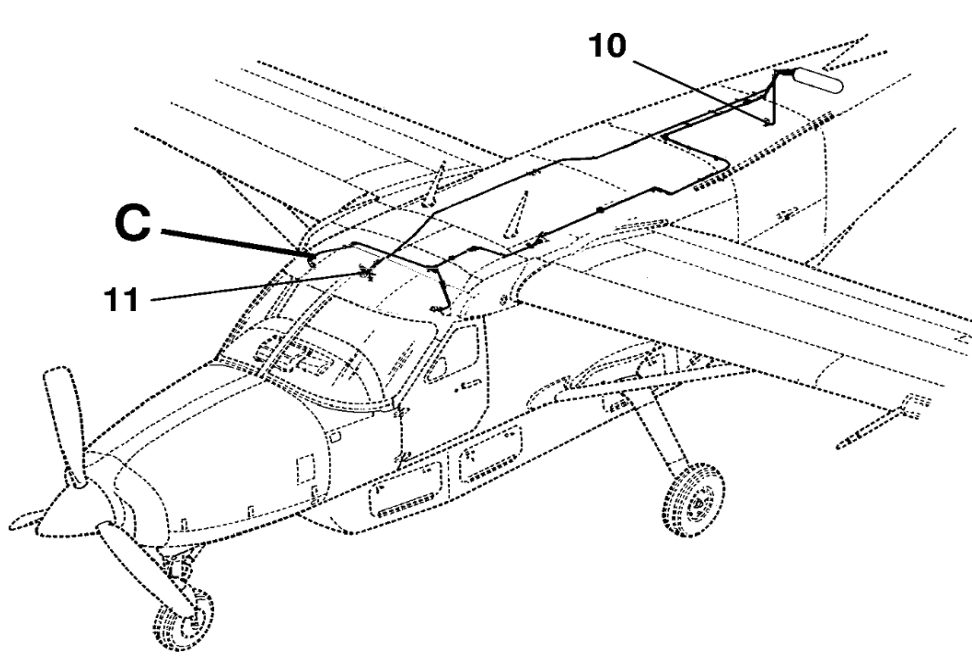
Sheet 2 : 208/208B Outlet Valve Installation
